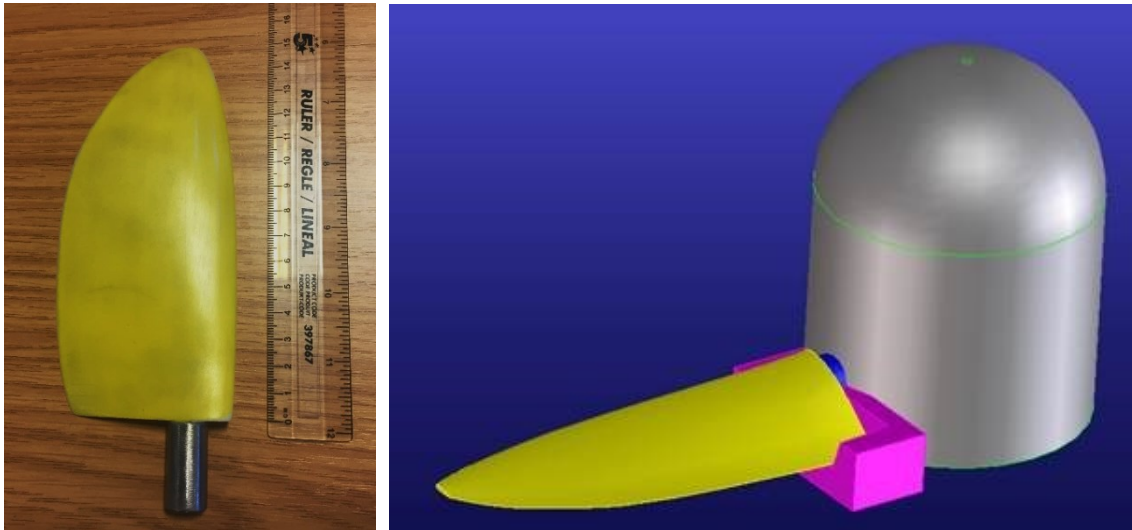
The 3-D printed blade (left) and pitch angle setting mould (right)
